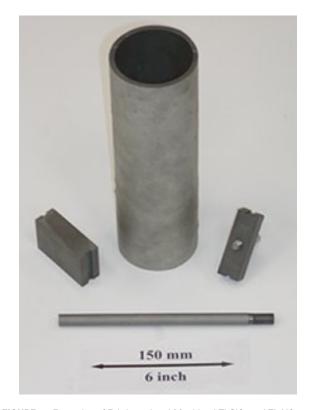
Examples of Fabricated and Machined Ti₃SiC₂ and Ti₃AlC₂
